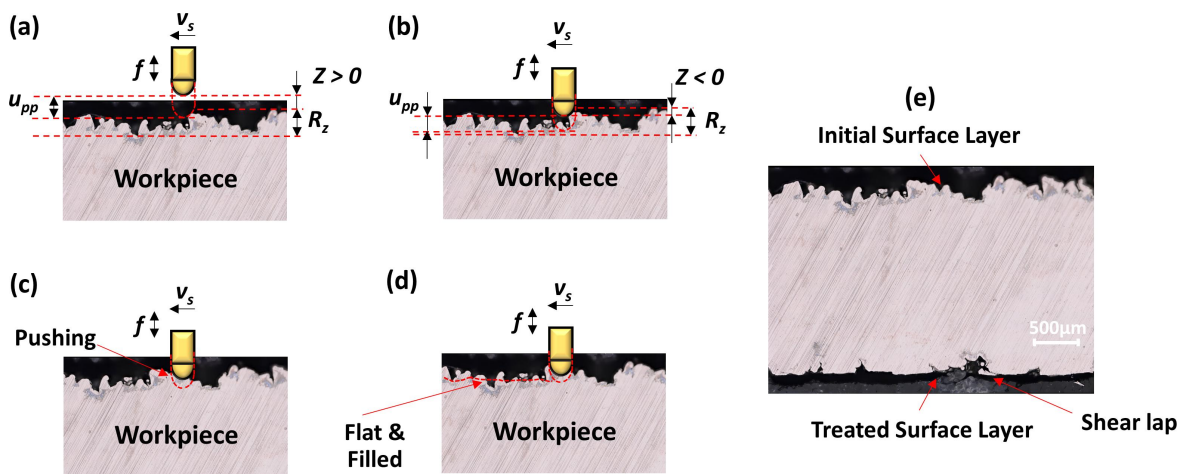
(a) – (d) The schematic illustration of tool engaging process; (e) The cross-section of the treated workpiece after PVST.
